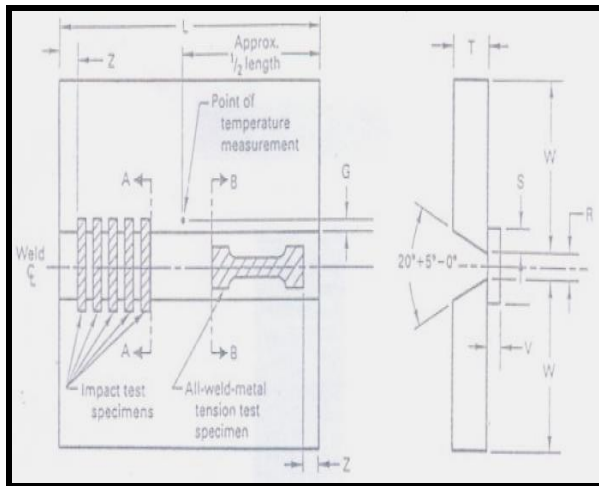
Schematic location of test pieces in an all-weld assembly.
